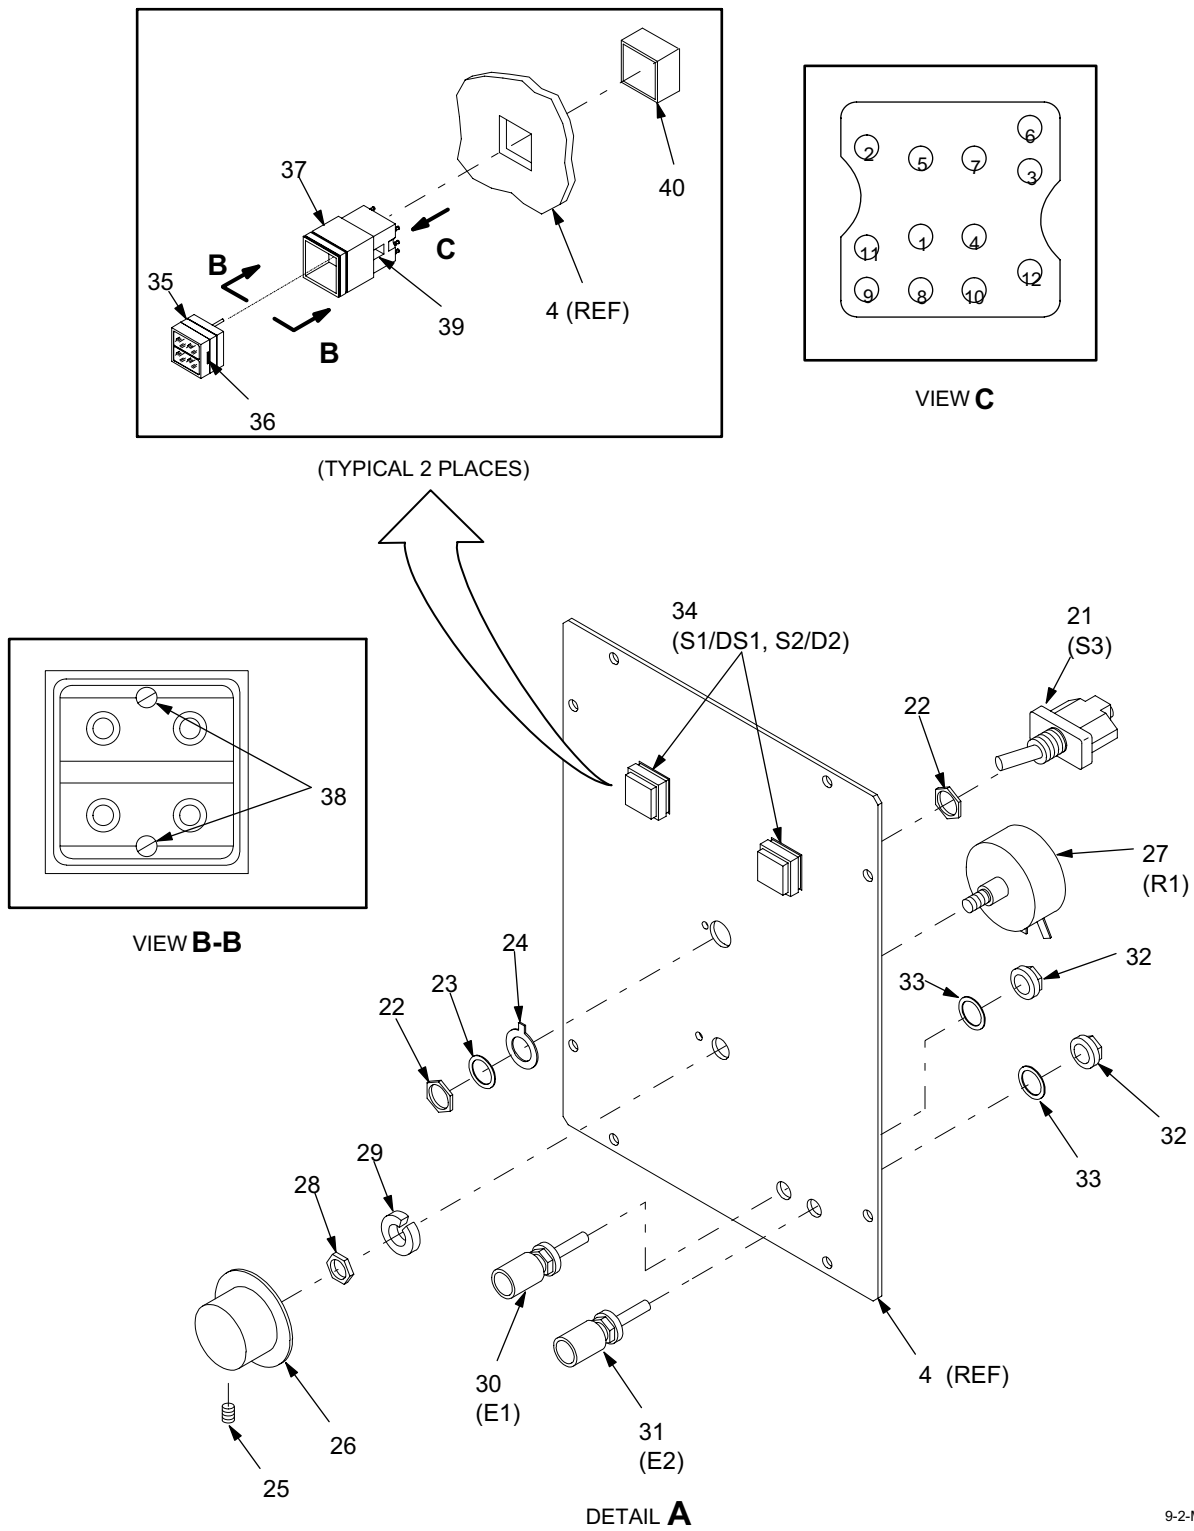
Control Box Assembly Repair (Sheet 1 of 3)
